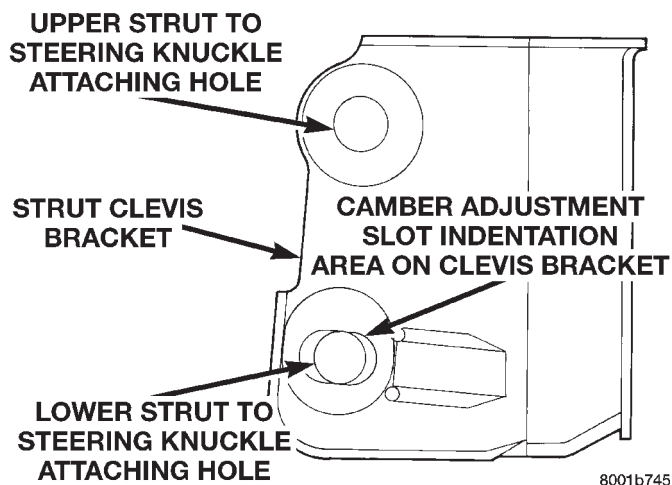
Strut Clevis Bracket Bolt Hole Grinding Area
